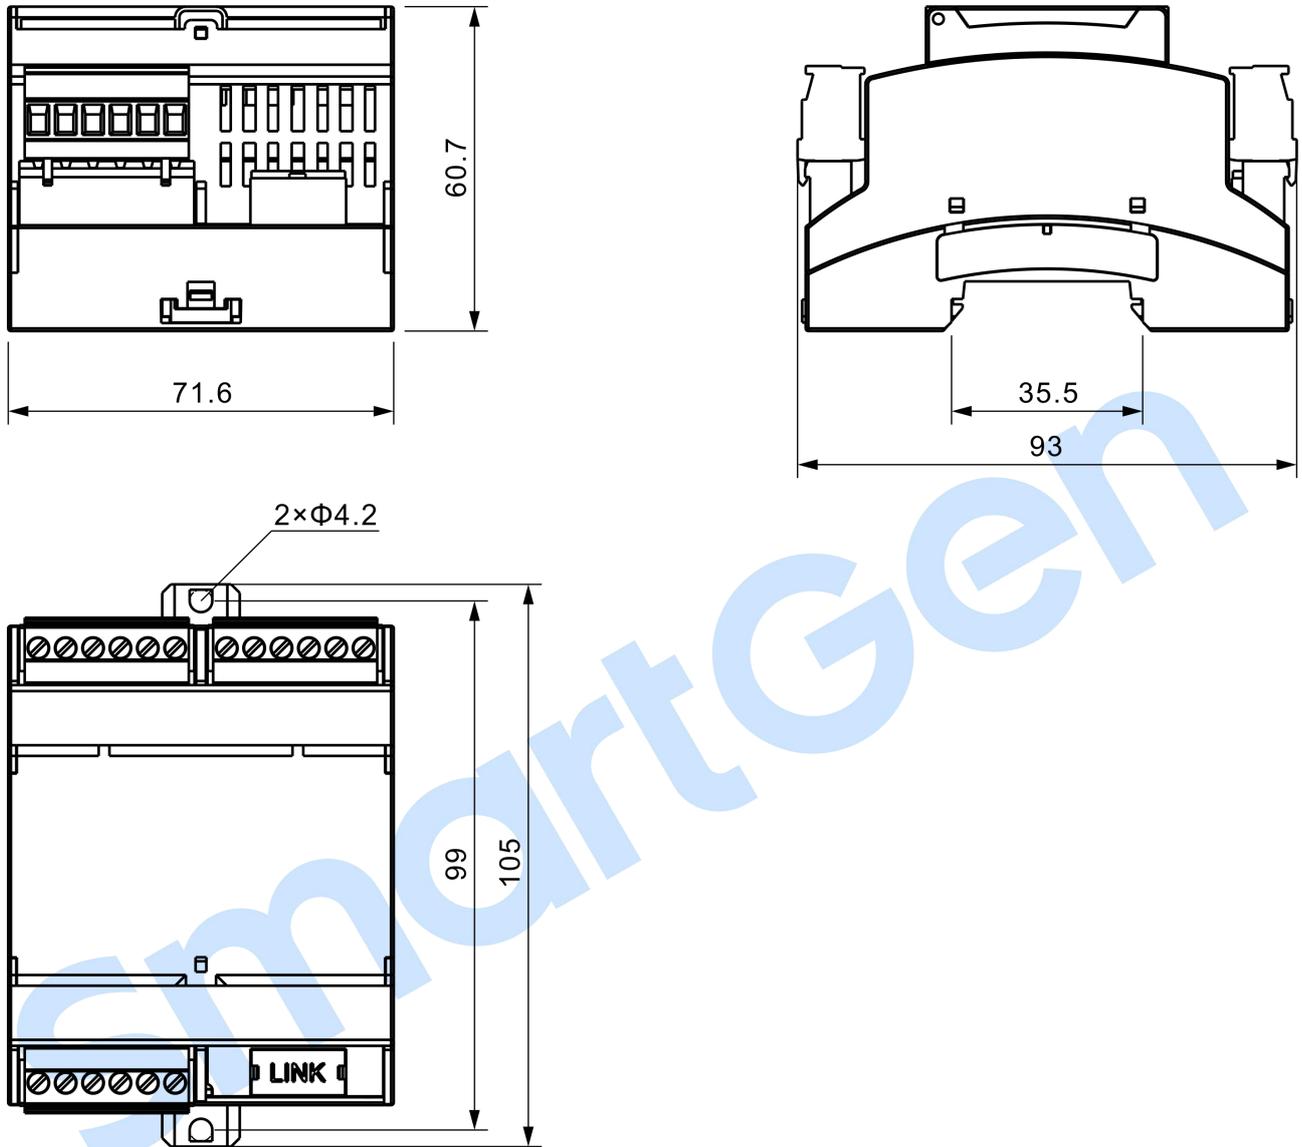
Overall and Cutout Dimensions (Unit: mm)
